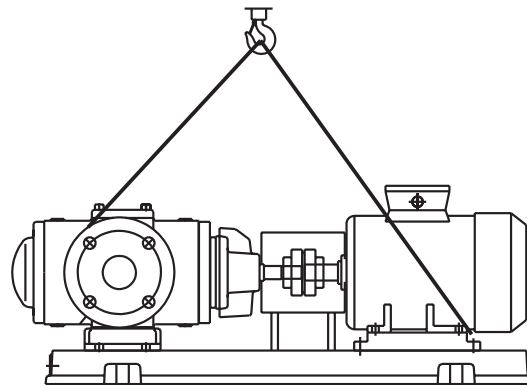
Fastening the lifting gear to the pump unit horizontally (as illustrated)
